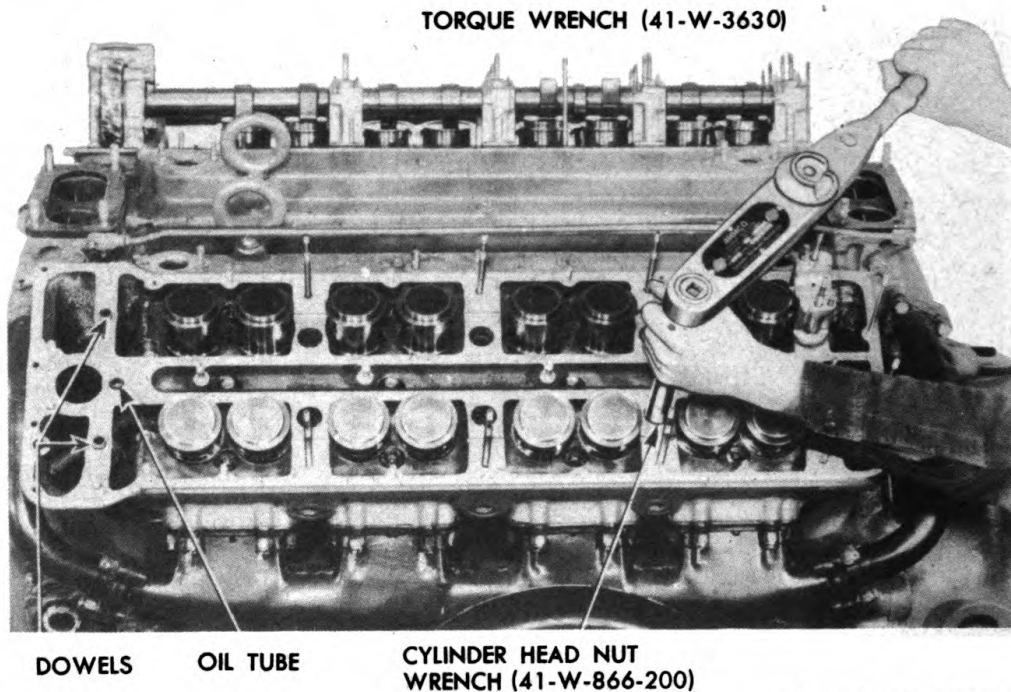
Tightening Cylinder Head Long Stud Nuts
